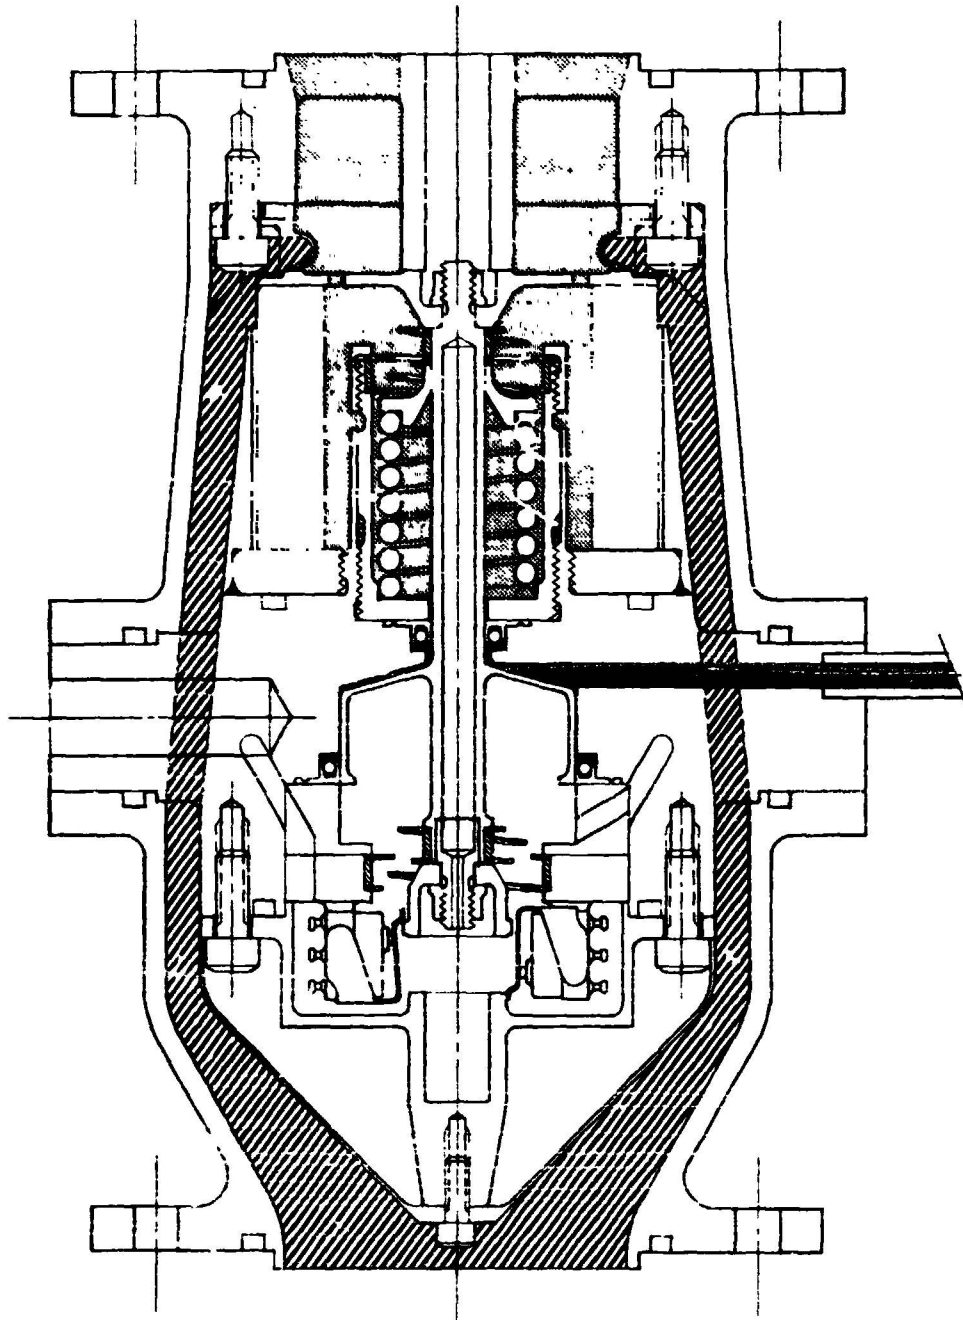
Coaxial Poppet Valve - Pressure Open / Spring Close
